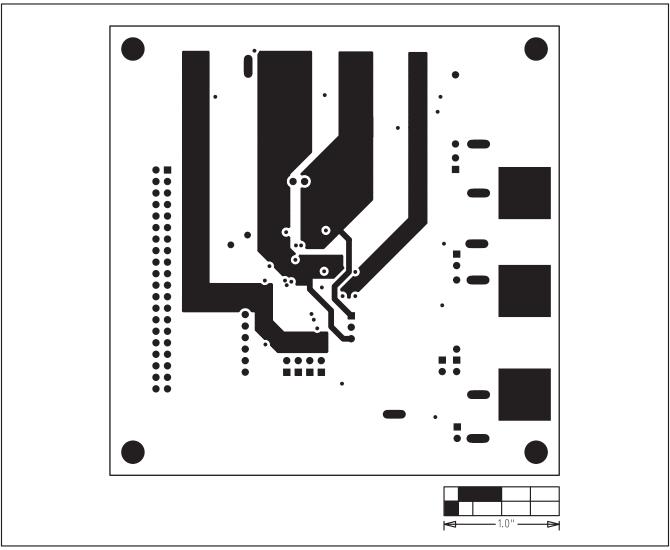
MAX5661 EV Kit PCB Layout—Layer 3 (Power)
